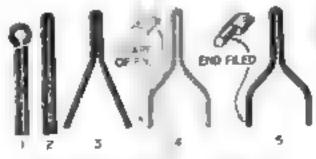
Steps in making a valve-grinding tool from a heavy sold cottax key
